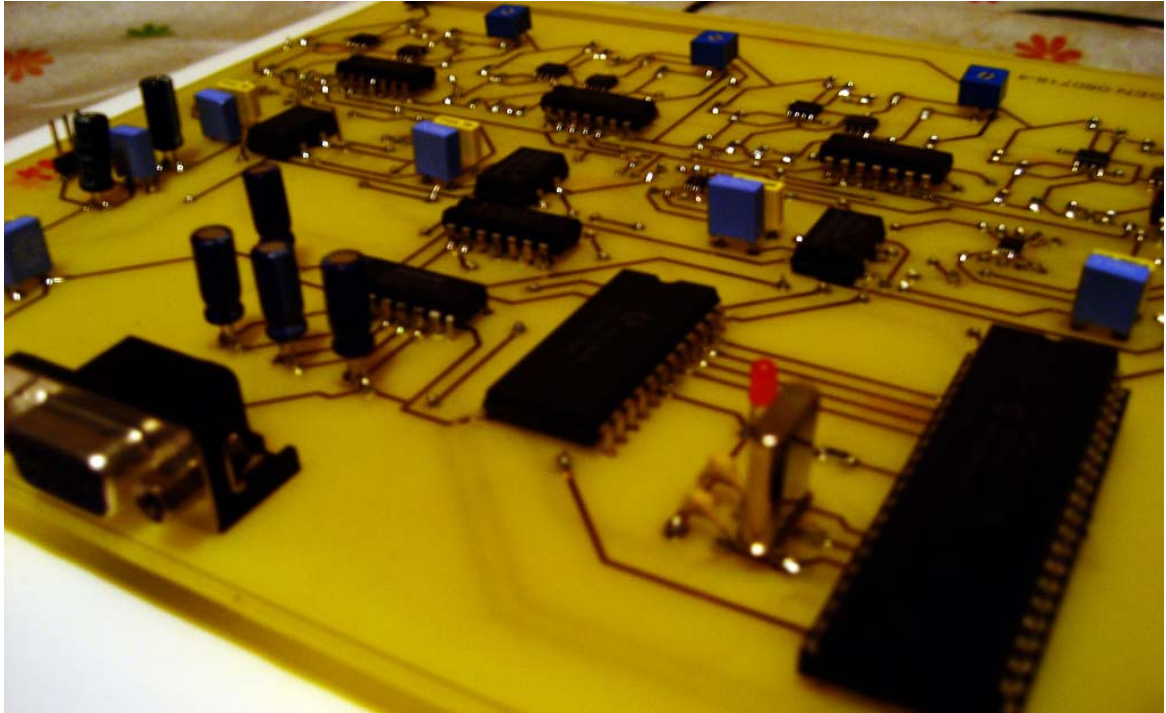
The fabricated PCB board of the multiple output waveform generator (Version 1)
